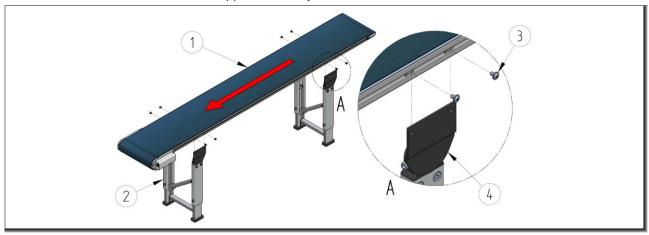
Assembly, conveyor with support AM 920 (typical)
